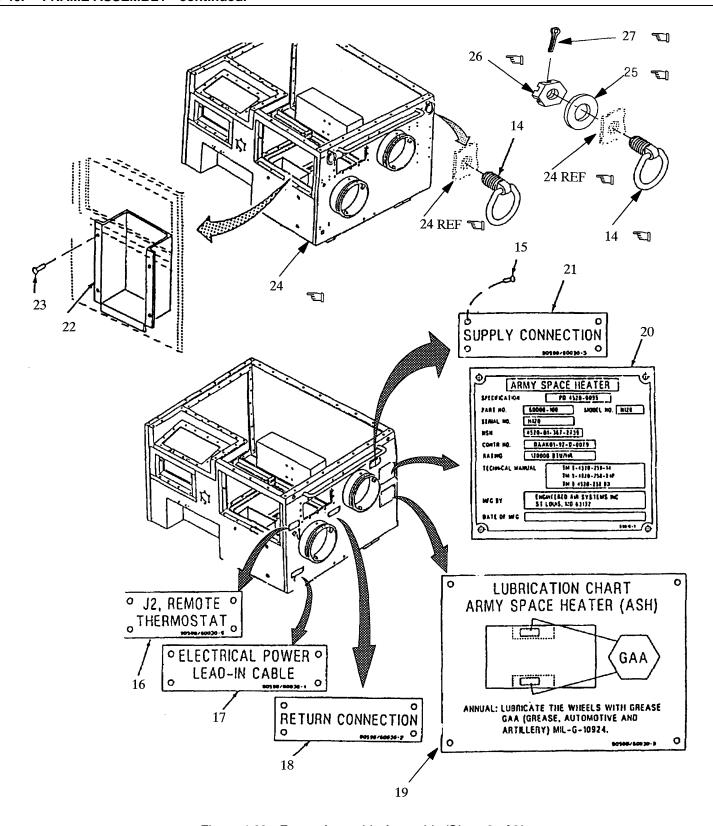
Frame Assembly Assembly (Sheet 2 of 2)
